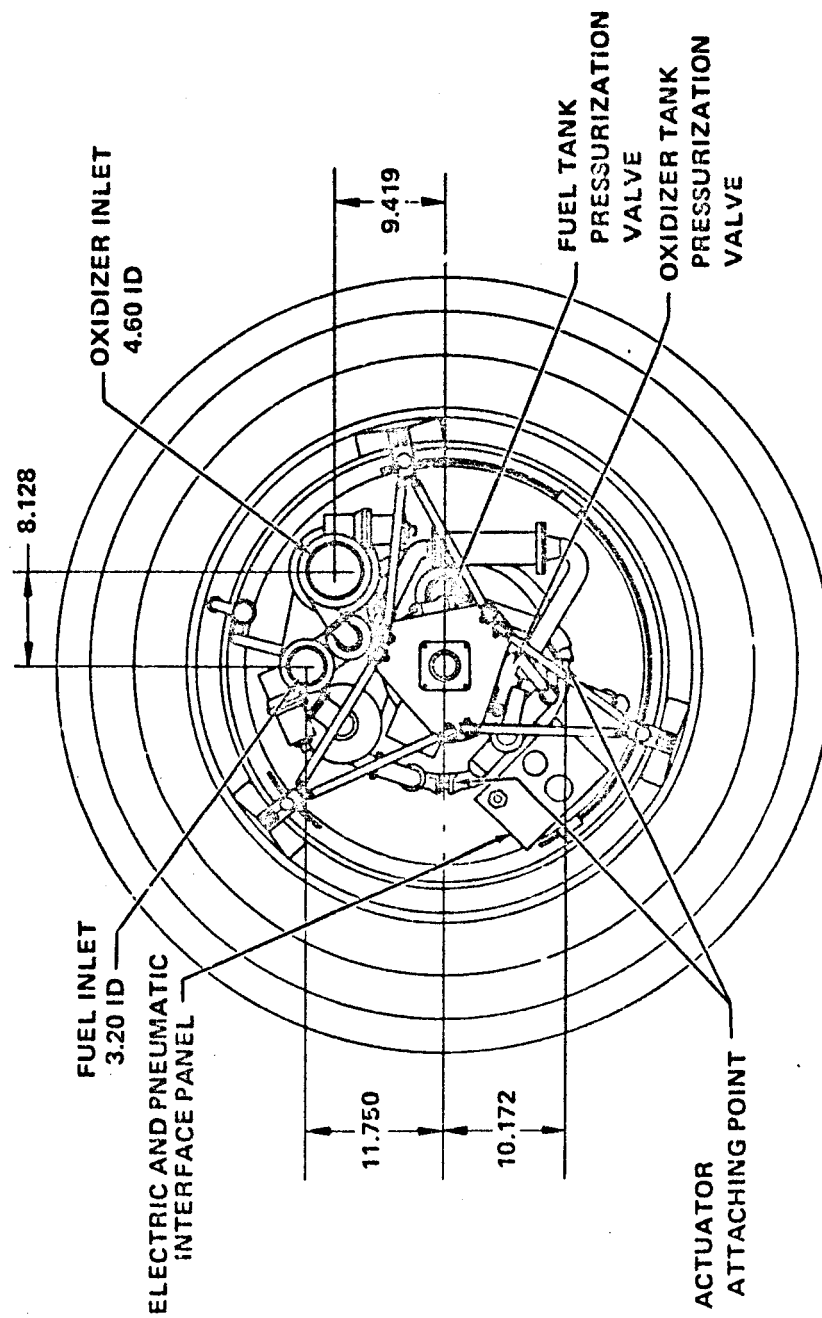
Category IV Engine Installation Drawing (Sheet 1)
